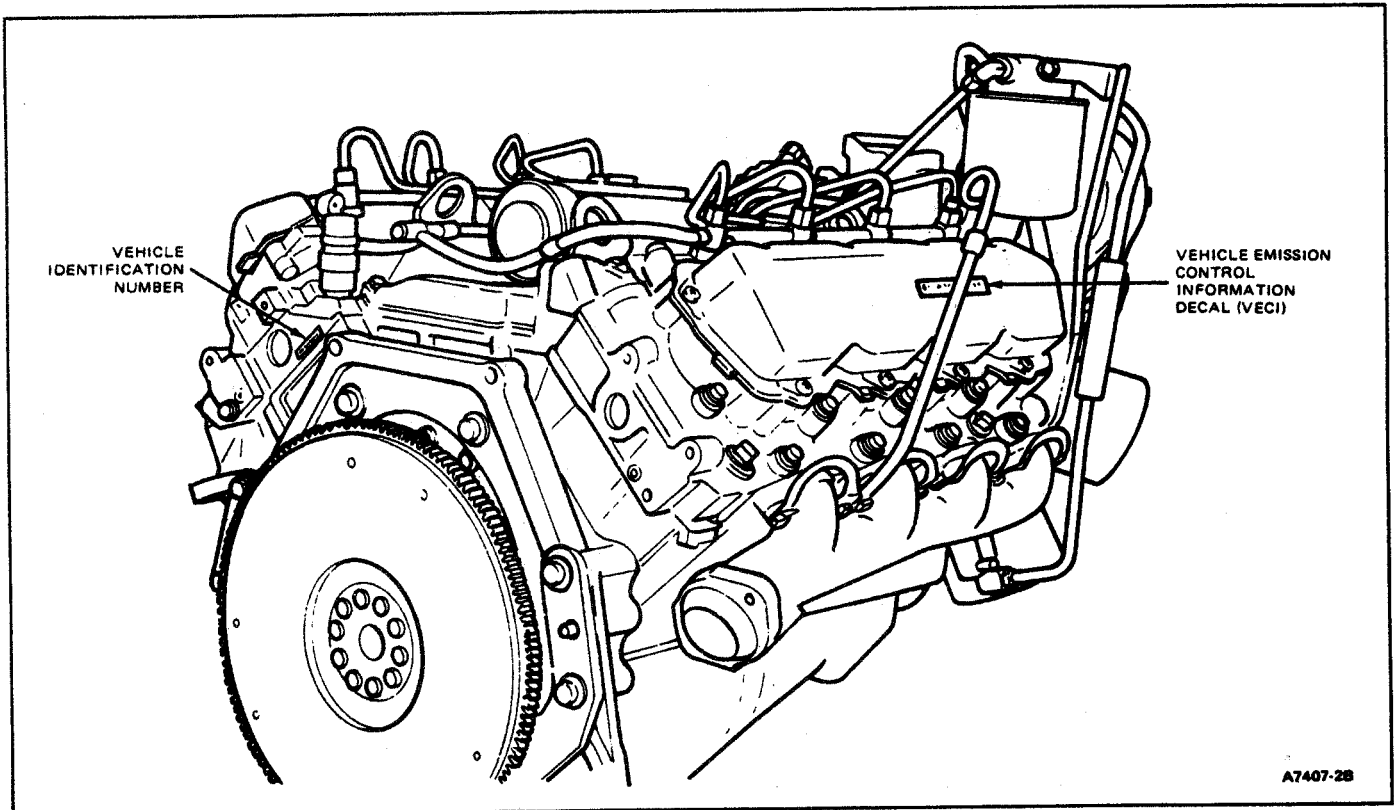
6.9L Diesel—Right Side—F-150—F-250 Shown, E-150—E-350 Similar
